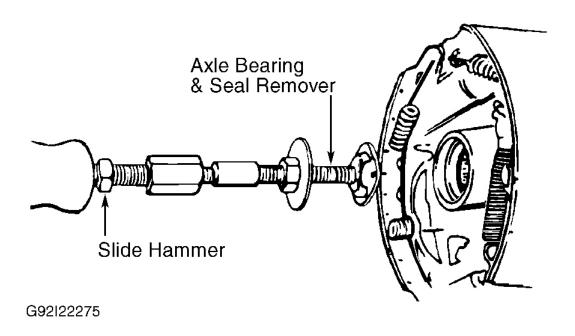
Removing Axle Bearing & Seal Courtesy of GENERAL MOTORS CORP.
